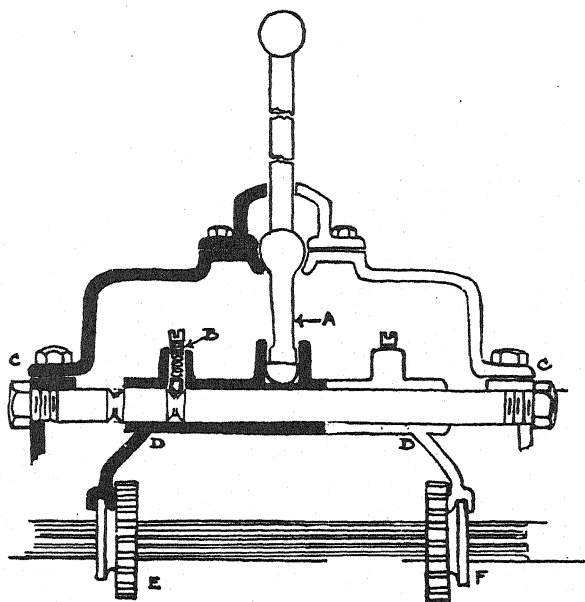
One type of gear-shifting mechanism. A—Shifting lever. B—Stop pin and spring. C—Adjusting nuts for gear-shifting shaft. D—Shifting yoke or fork. E and F—Sliding gears.
